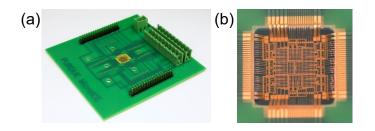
(a) Photograph of the test chip mounted to the PCB with heaters and sensors face up, and (b) zoomed-in view of the heaters and sensors wire-bonded to PCB contact pads.
